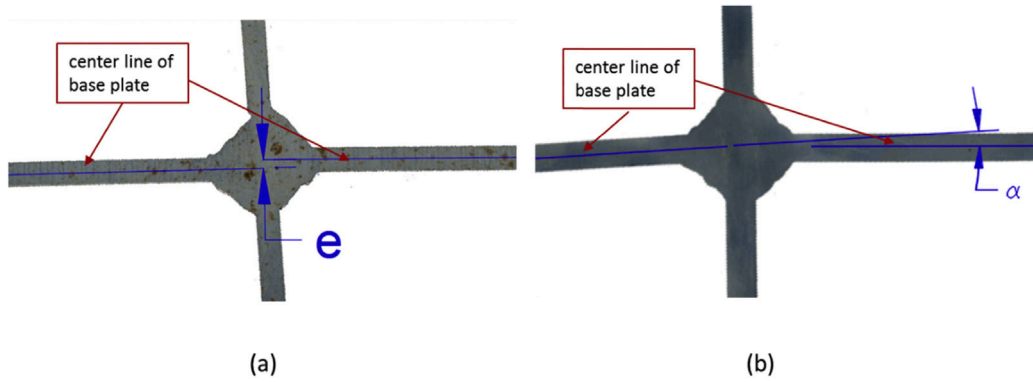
Definition of two types of joint misalignment in fillet welded connection: (a) axial misalignment; (b) angular misalignment [19].
